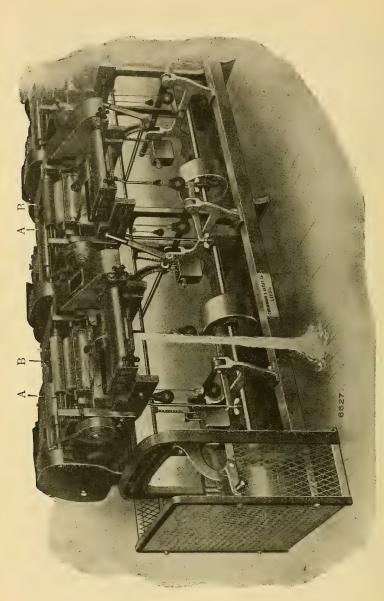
OPEN, OR SINGLE SCREW GILL DRAWING FRAME, OF FOUR HEADS, ALL ON ONE STAND AND EACH DRIVEN SEPARATELY.
